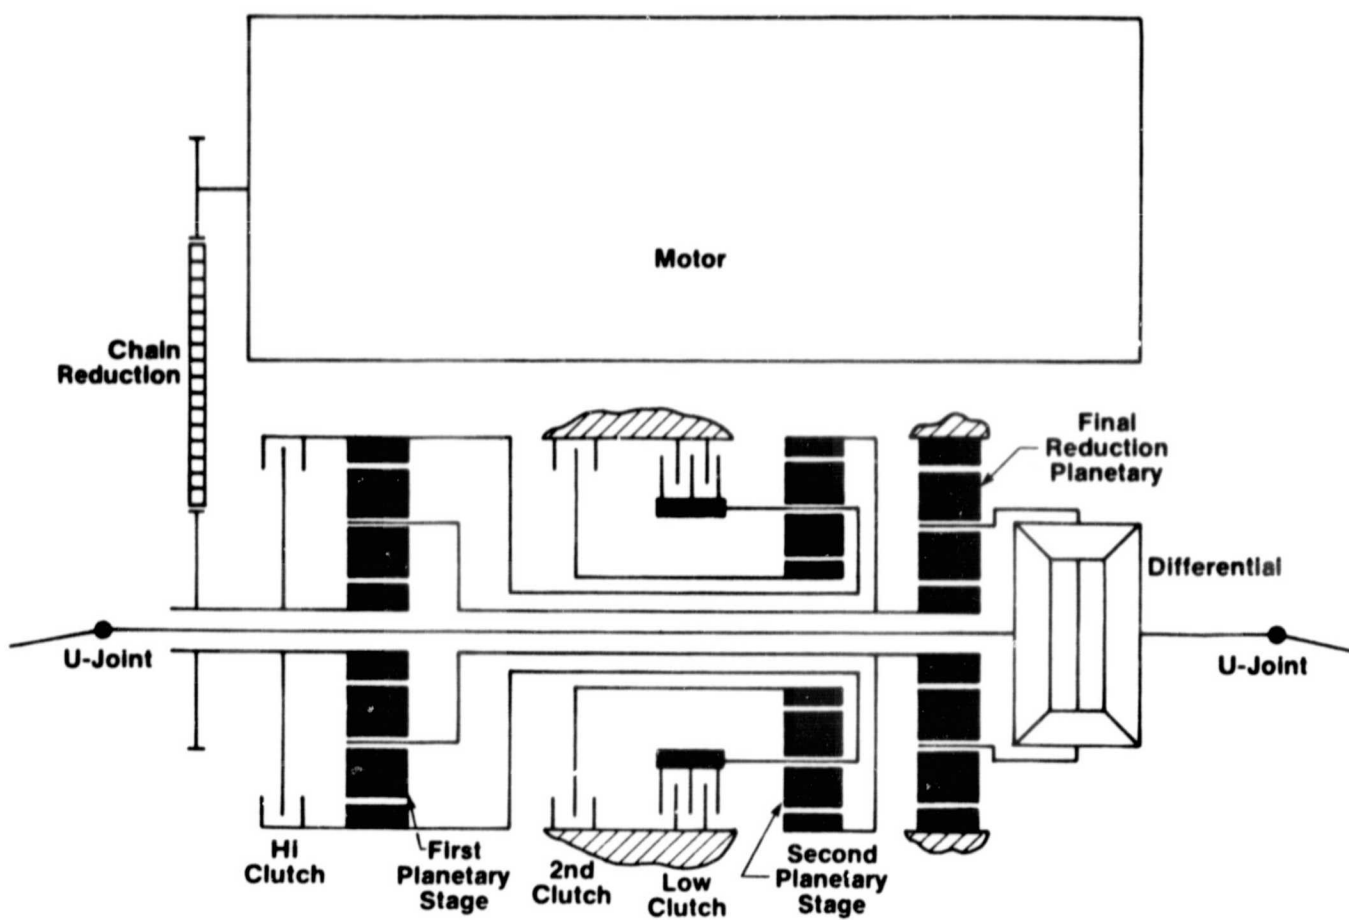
Trans/Axle/Motor Assembly
